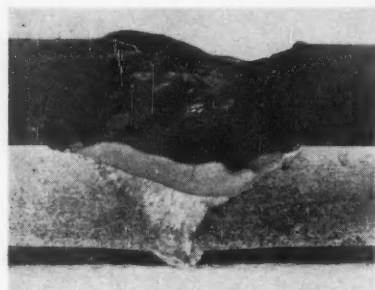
View of top surface and cross section of severely corroded furnace tube at weld.
